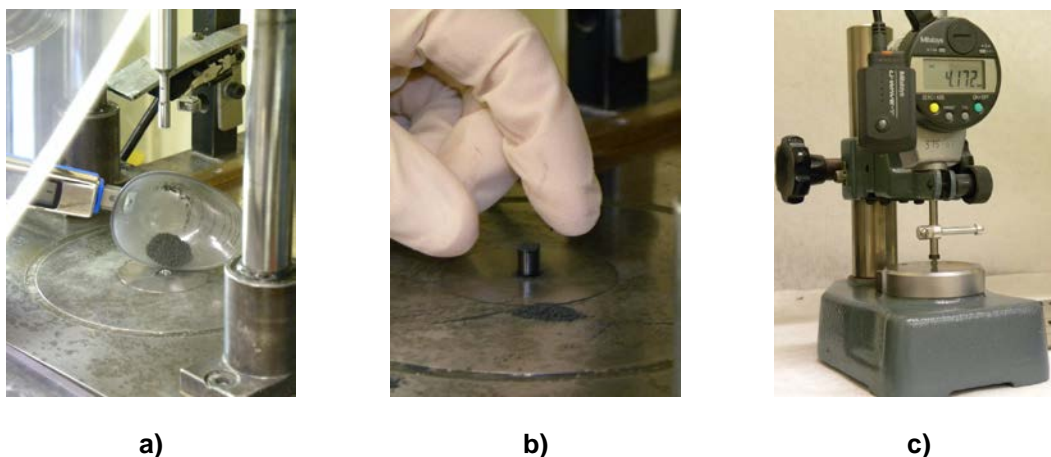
Pellet Fabrication Pictures: a) Granule feed for final pressing b) Green pellet after final pressing c) Sintered pellet after grinding
